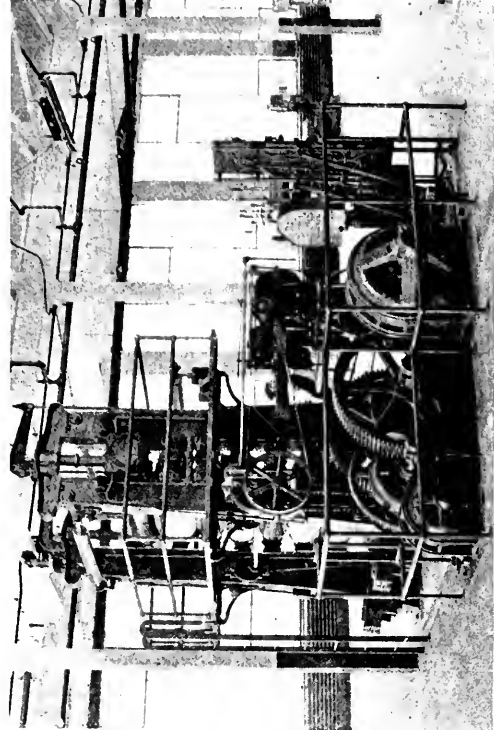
75-h.p. Slip Ring Induction Motor and 7 1/2 h.p. Squirrel Cage Motor driving 50-in. 9-roll stack paper calender, Strathmore Paper Company, Woronoco, Mass.
